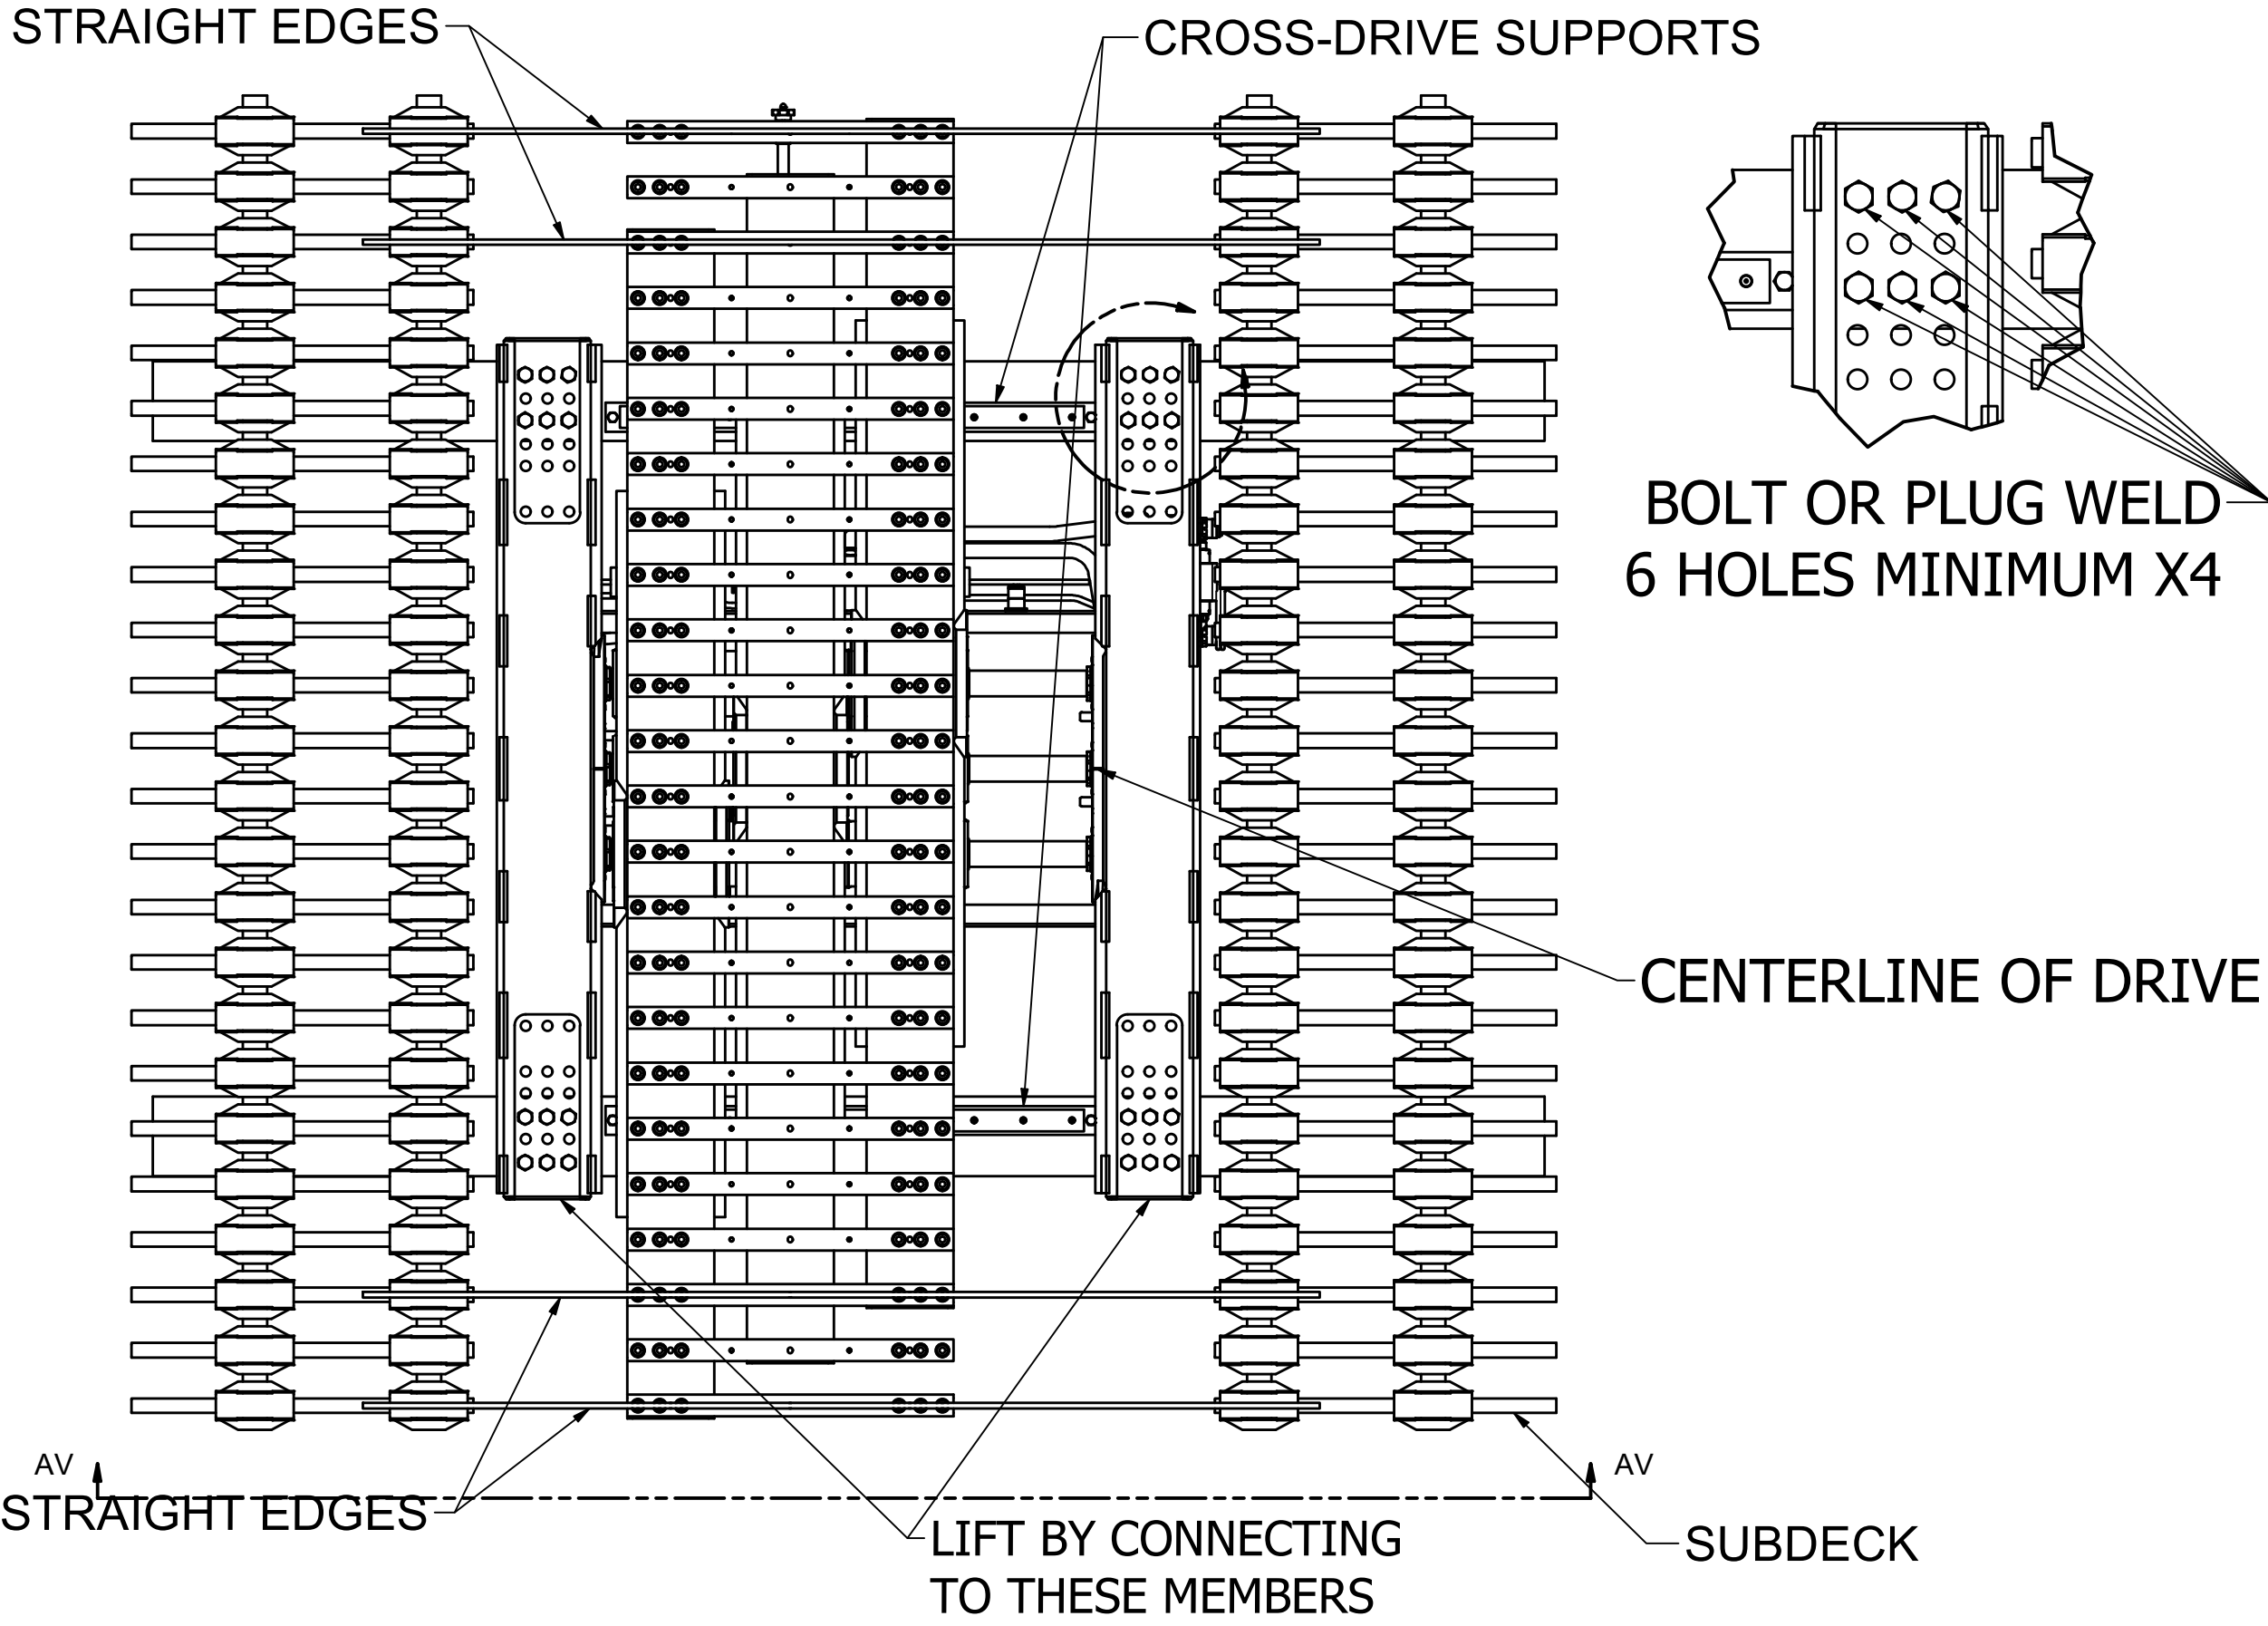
SIDE VIEW OF DRIVE UNIT
